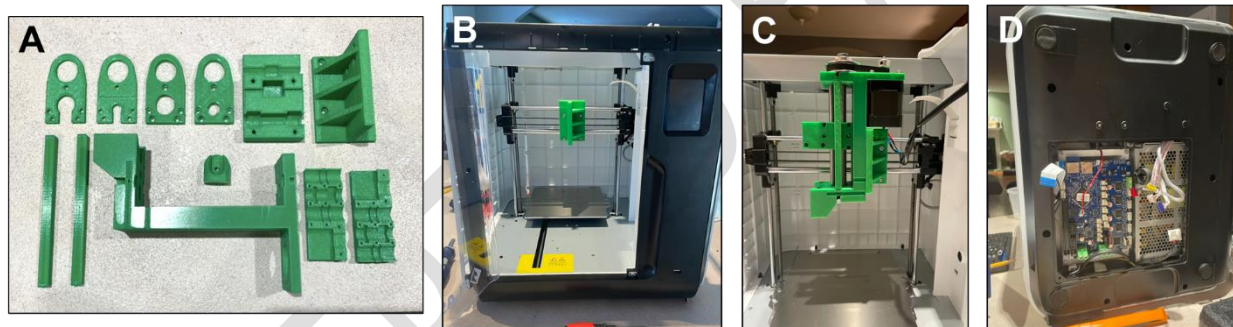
Fabrication of 3D bioprinter from FlashForge FDM 3D desktop printer. S1A: 3D printed PLA parts for fabricating bioprinter. S1B: Flashforge printer with original hot-end nozzle removed. S1C: Desktop printer with 3D printed Replistruder syringe parts assembled. S1D: Image of Duet wifi board replacement.
